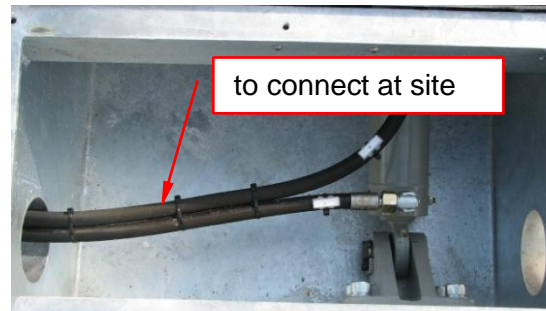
hydraulic hose inside cylinder housing, outgoing to second housing (only for Wedge > 3.0m)
